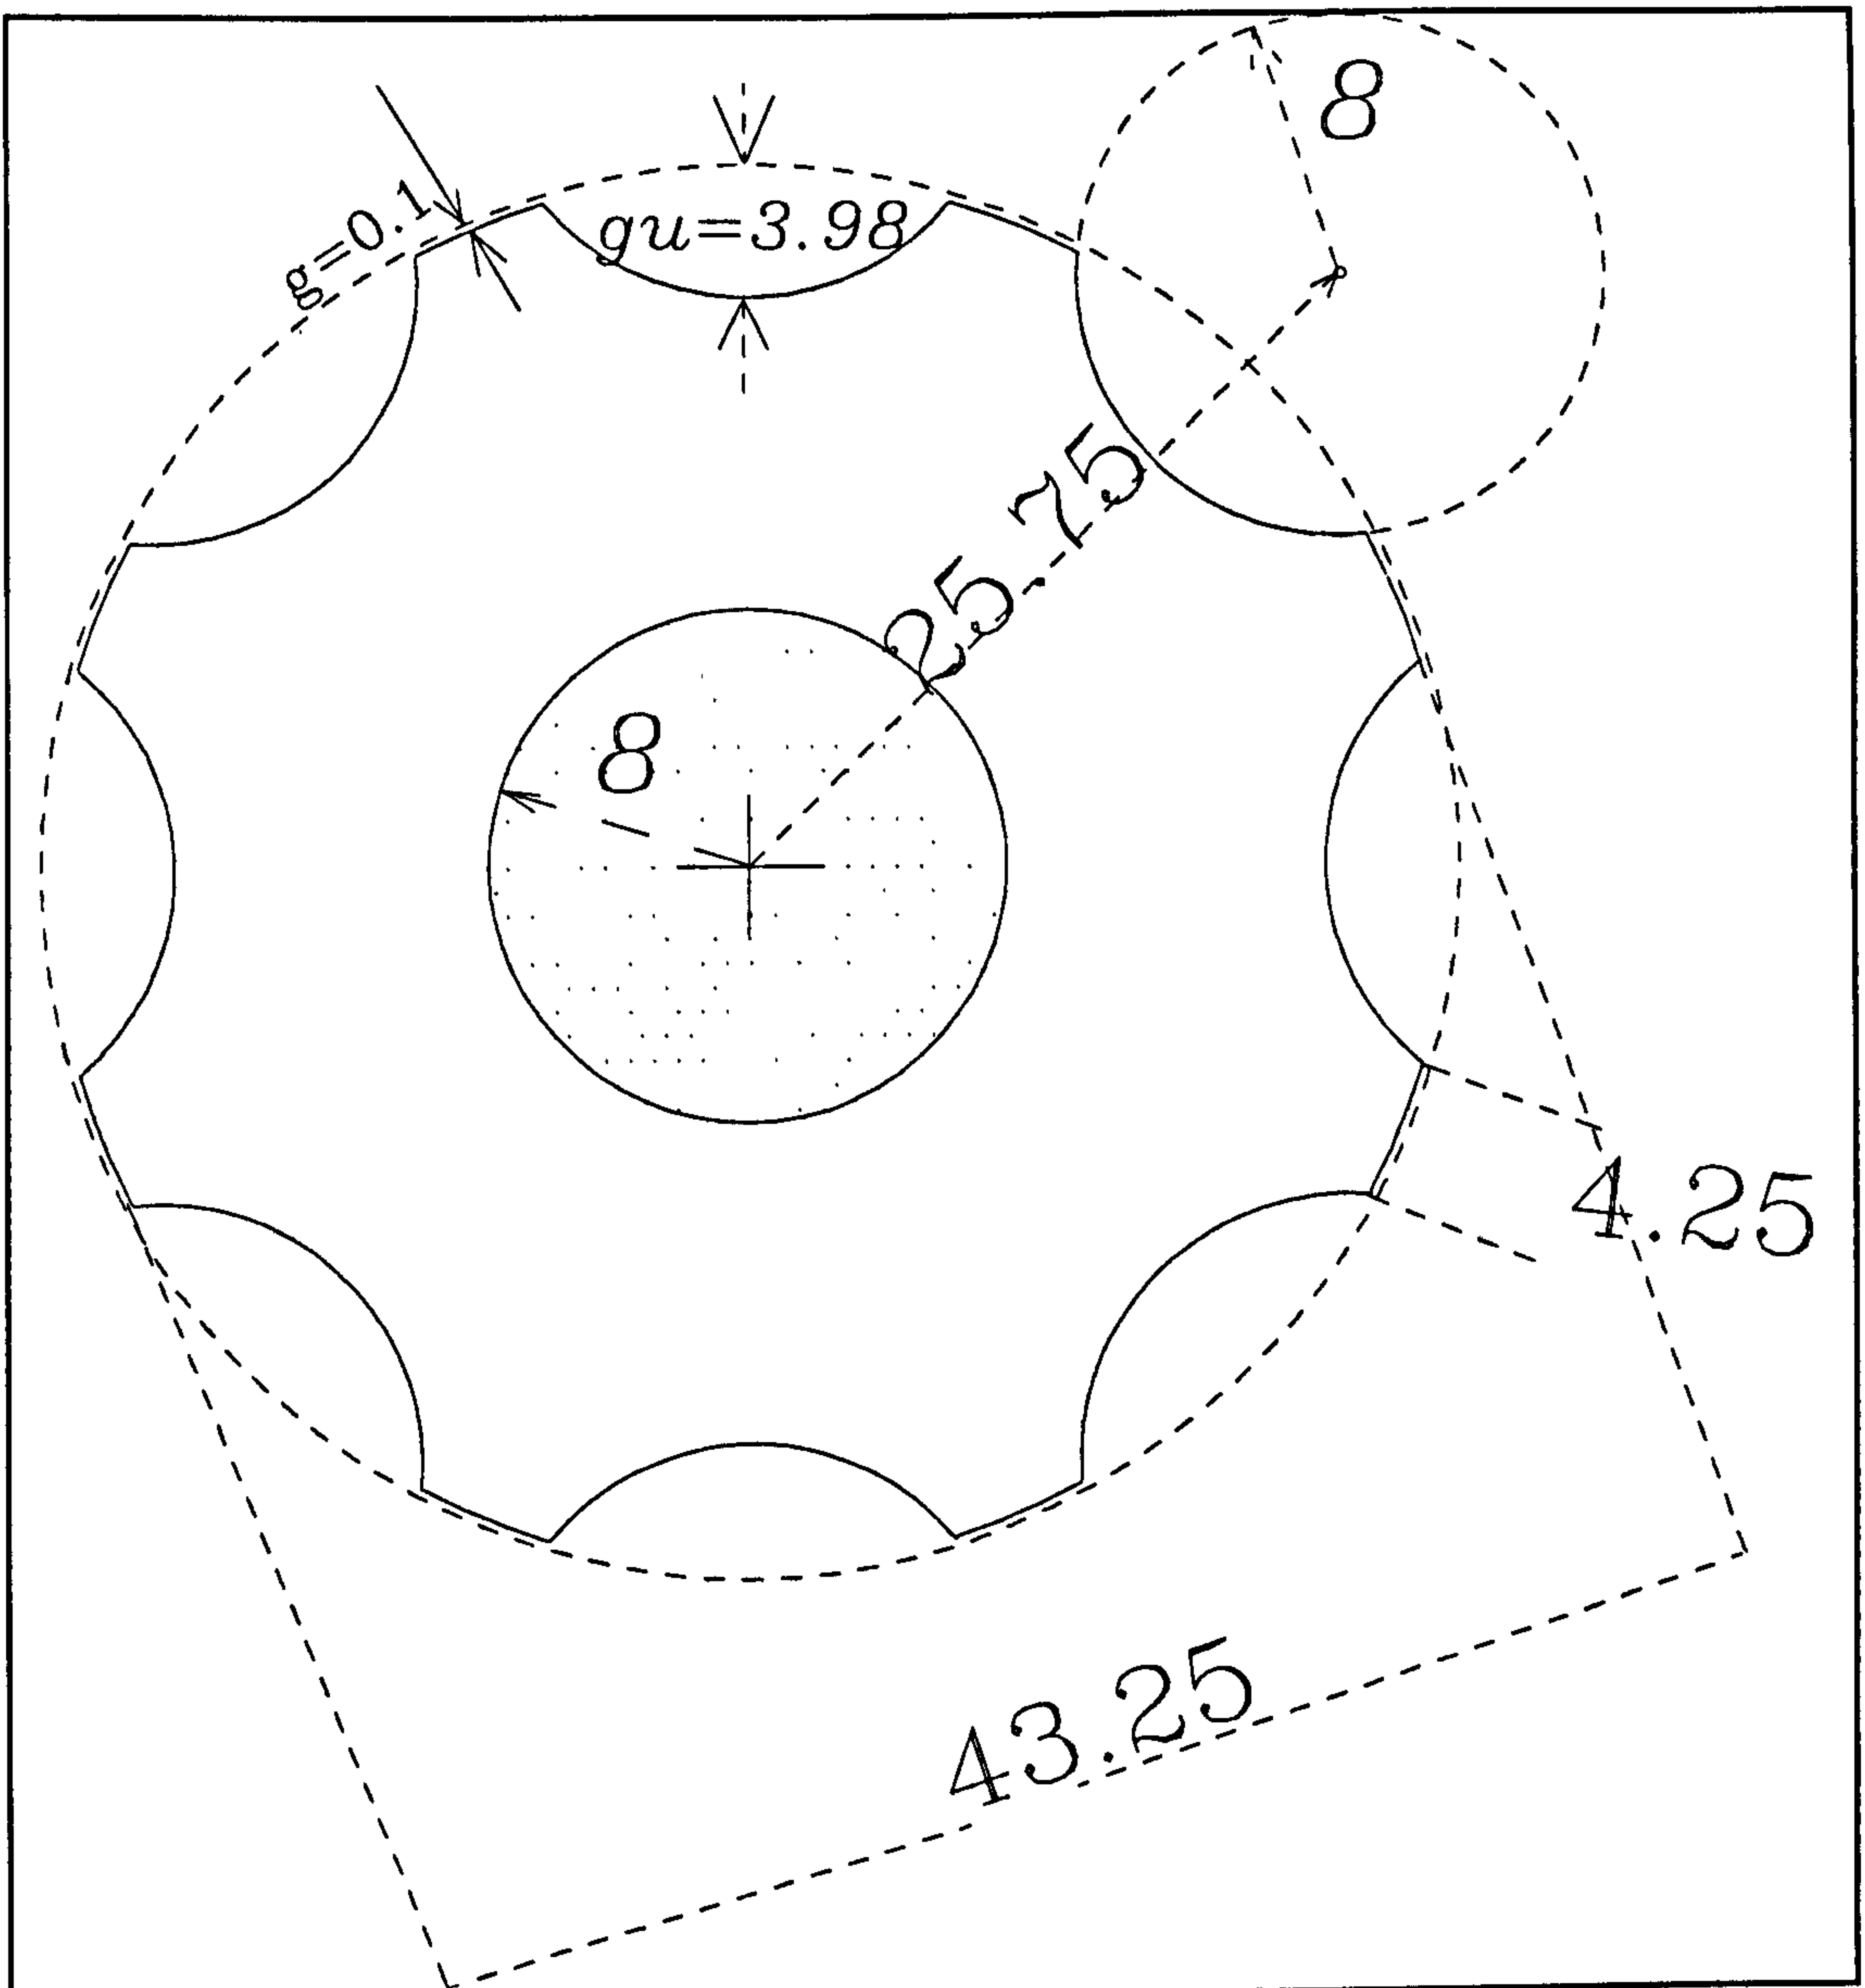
Cross section of the rotor lamination of the selected geometry. Dimensions in mm.
